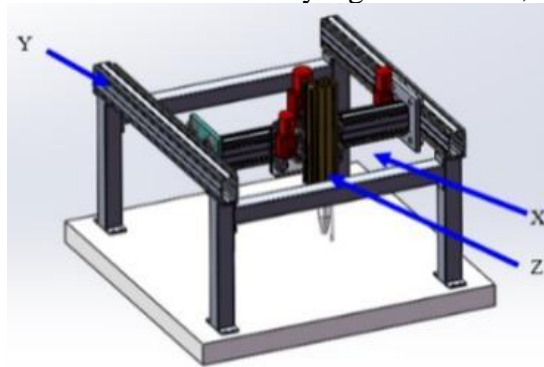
Mechanical Structure Diagram of the Automatic Dispensing Machine.
